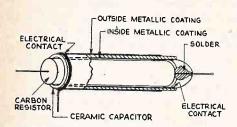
Enlarged isometric cross-section of the R12-C13 unit.
